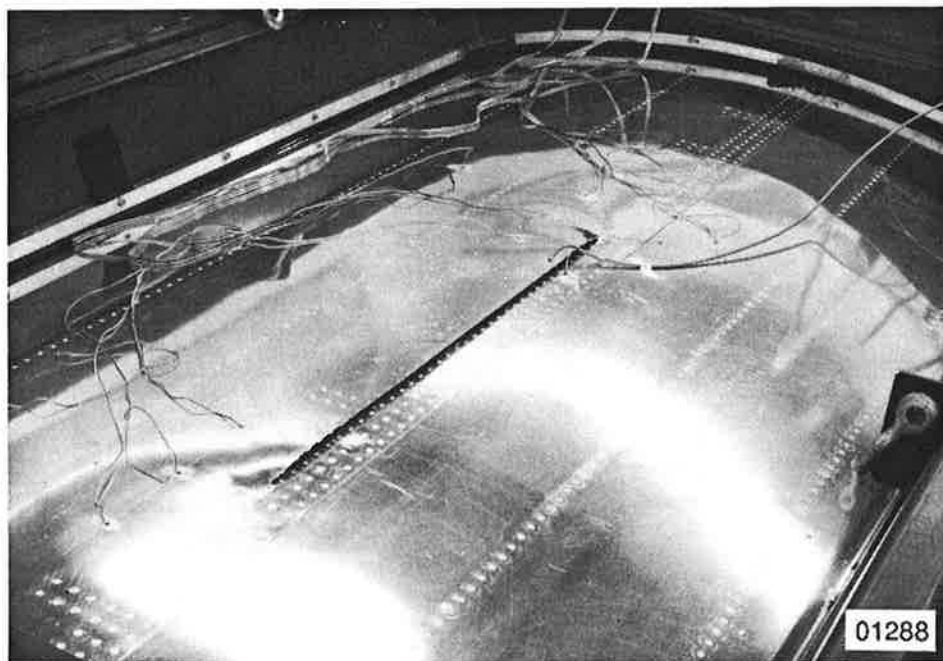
Panel 16 After Fracture: 23.36 in. Crack, Broken Frame at F3
